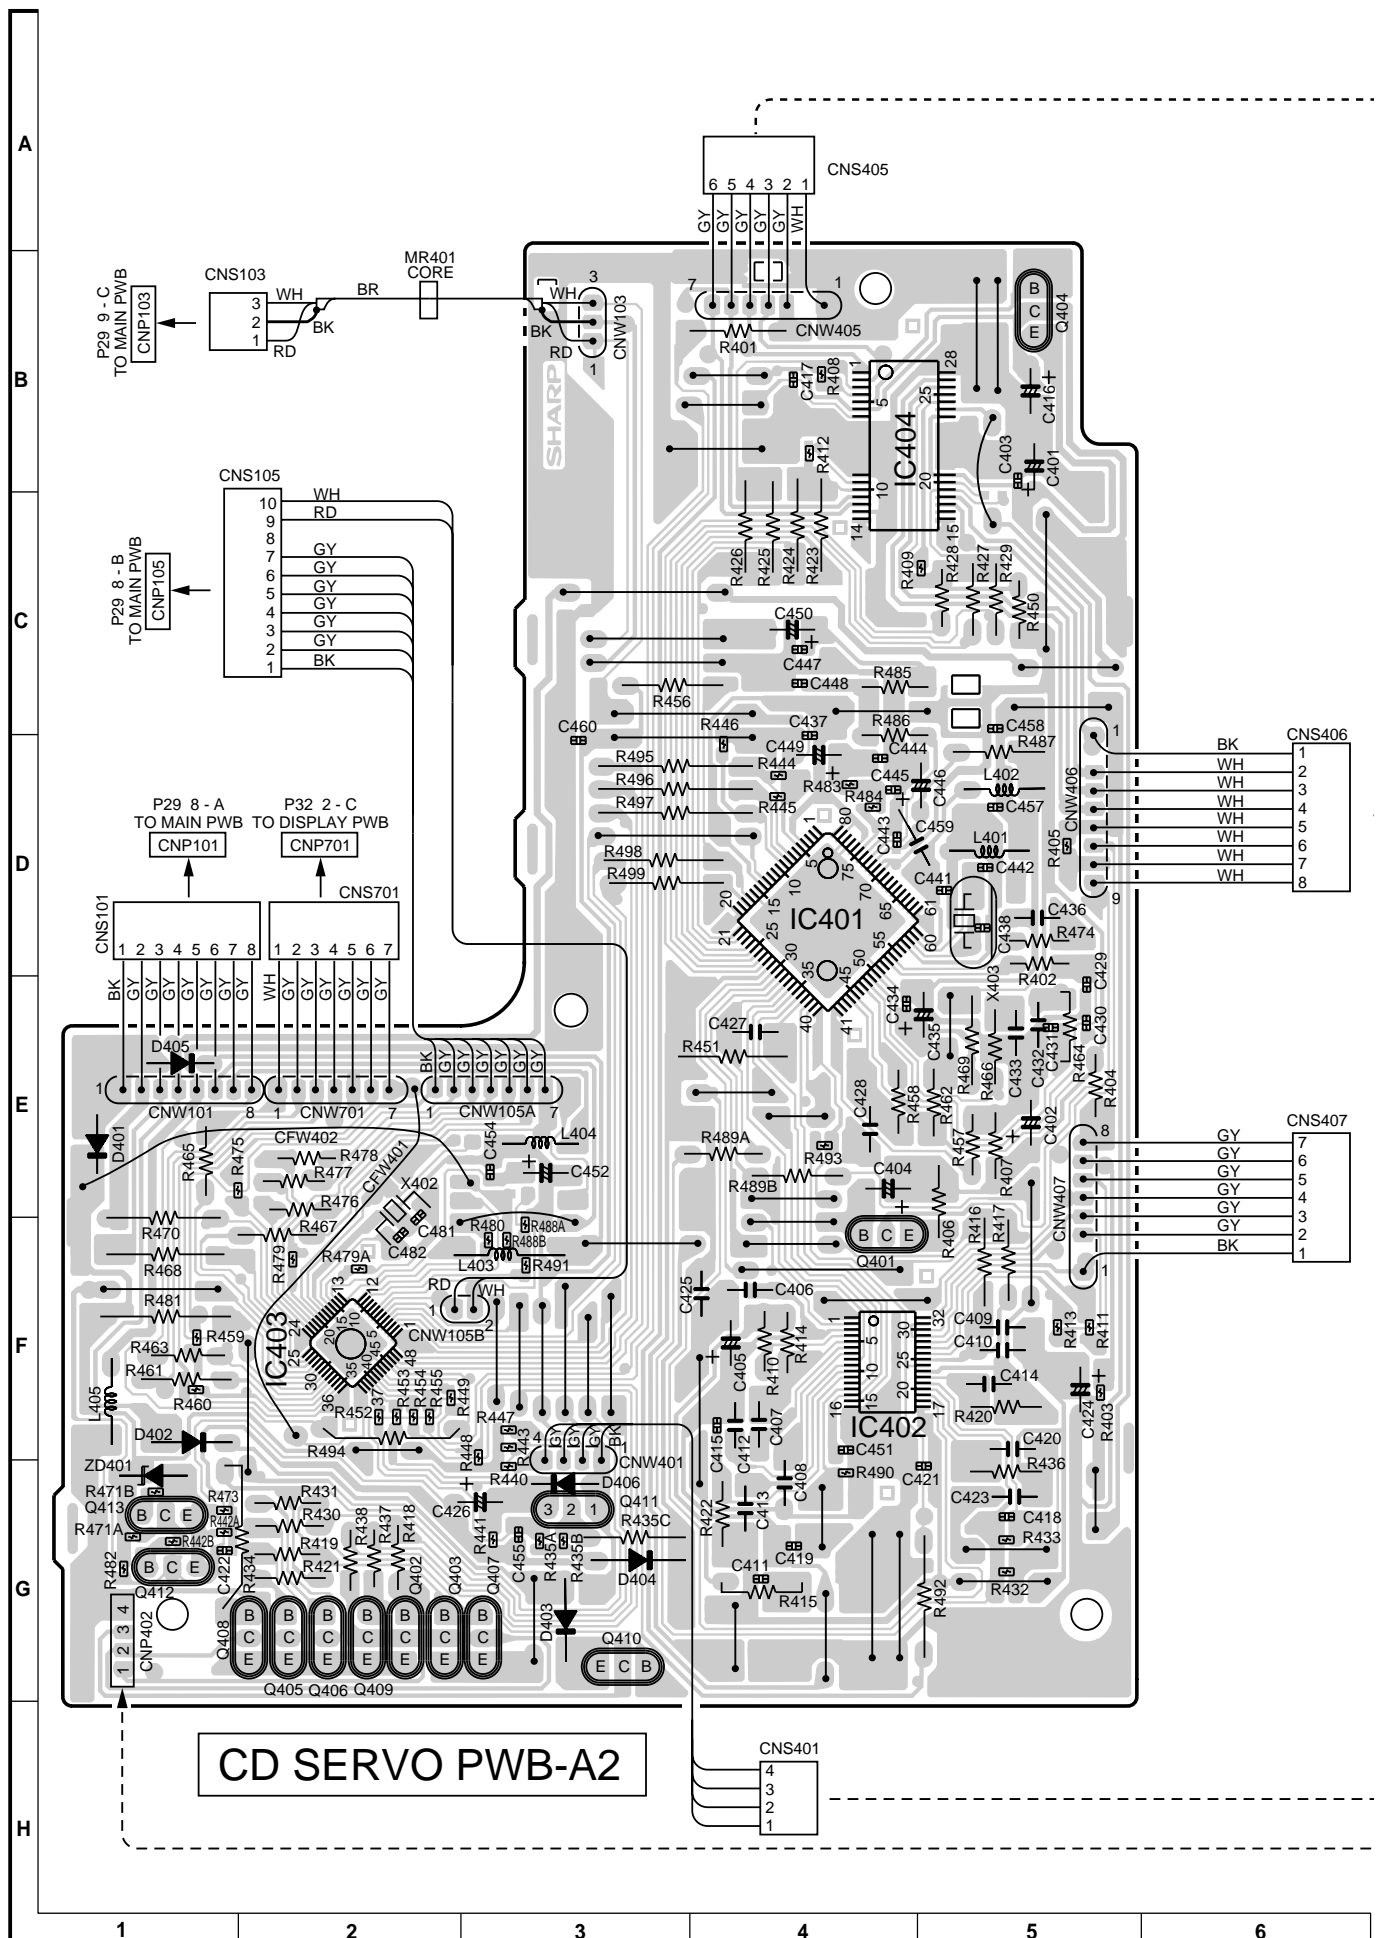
WIRING SIDE OF P.W.BOARD (3/8)
